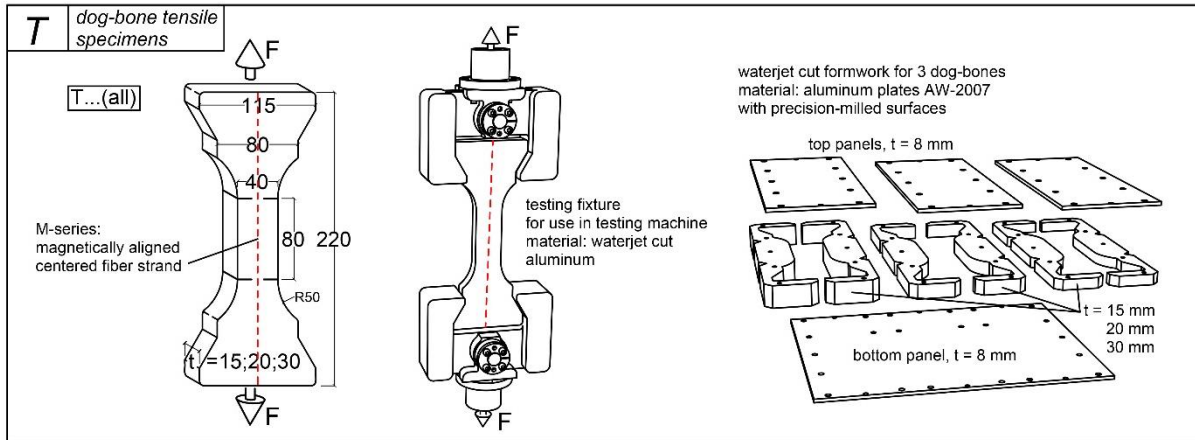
Shape and dimensions of the dog-bones (left), testing fixture (middle) and construction of the formwork (right)
